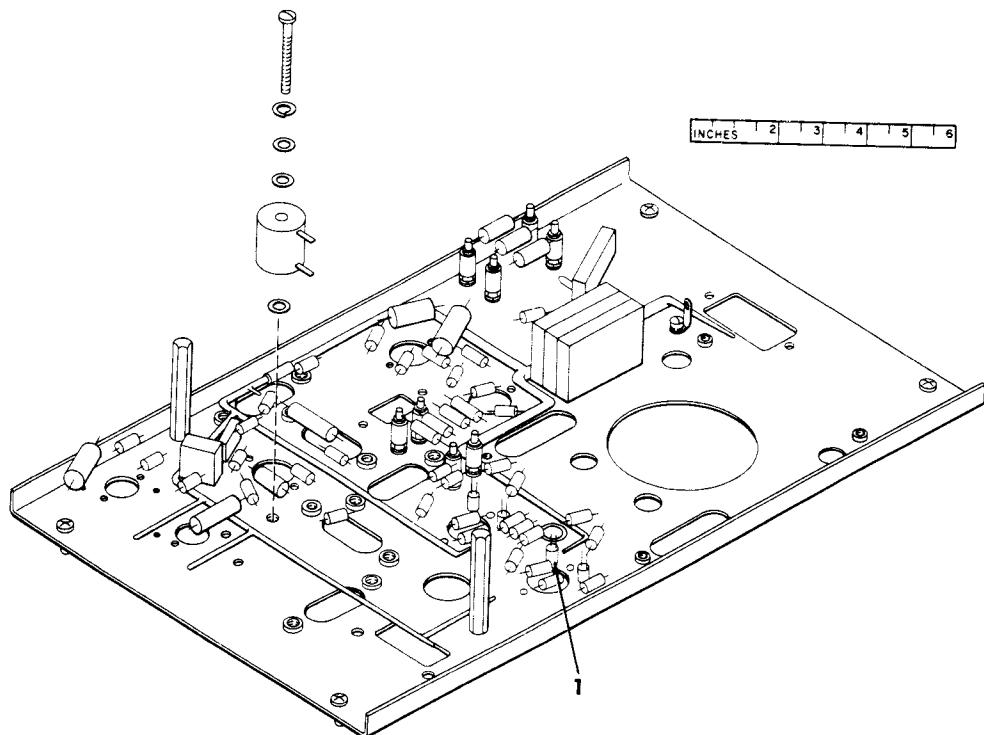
Generator, pulse O-300A/M (9000007) - partial exploded view
